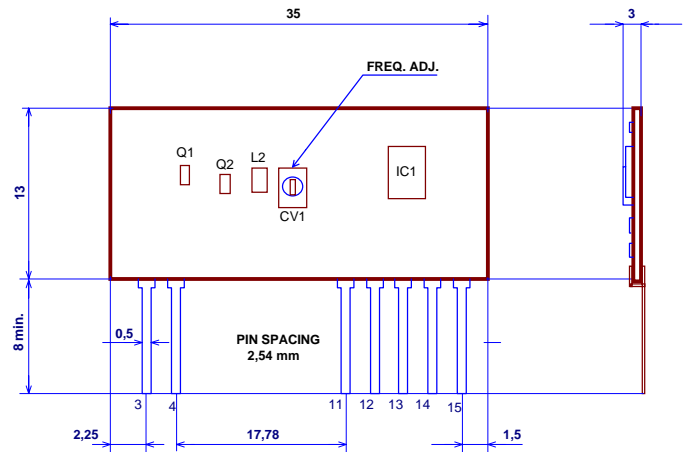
BR47 PHYSICAL DIMENSIONS.
